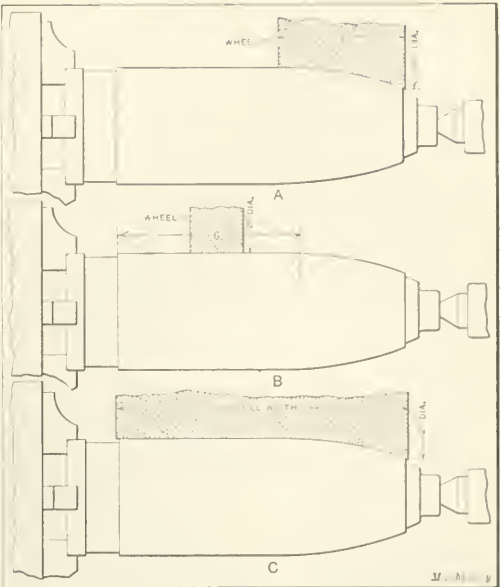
Diagram illustrating Method of finishing High-explosive Shell by grinding
